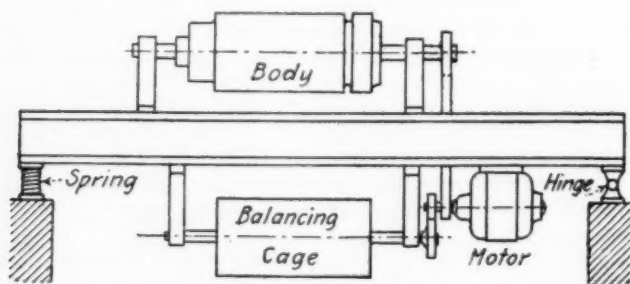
SQUIRREL-CAGE TYPE OF DYNAMIC BALANCING MACHINE
